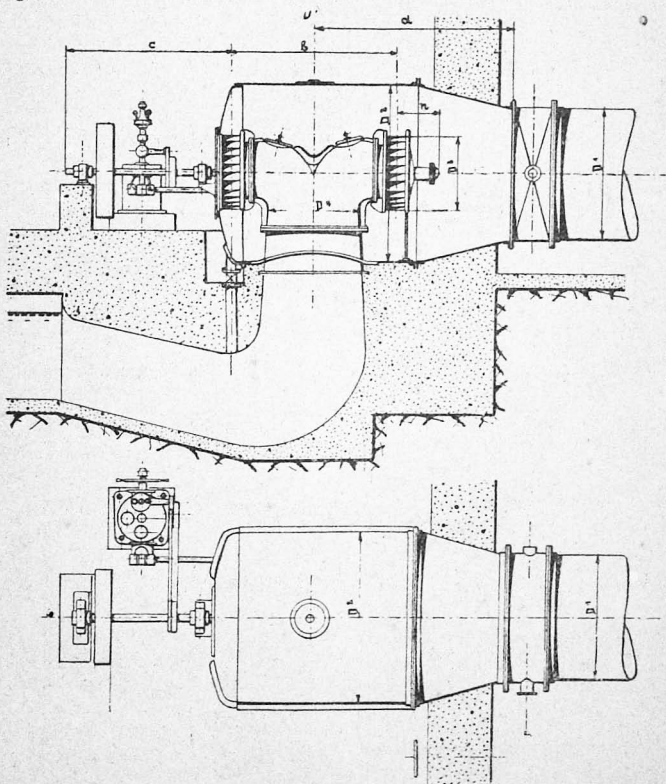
A.—DOUBLE FRANCIS TURBINE WITH HORIZONTAL SHAFT, AXIAL ADMISSION.
